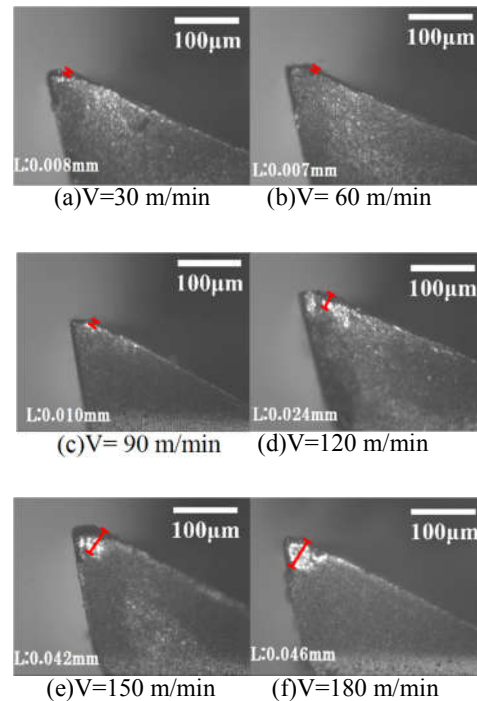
Photograph of wear of a major flank of a cutting tool (Tool diameter: 1.0 mm)
